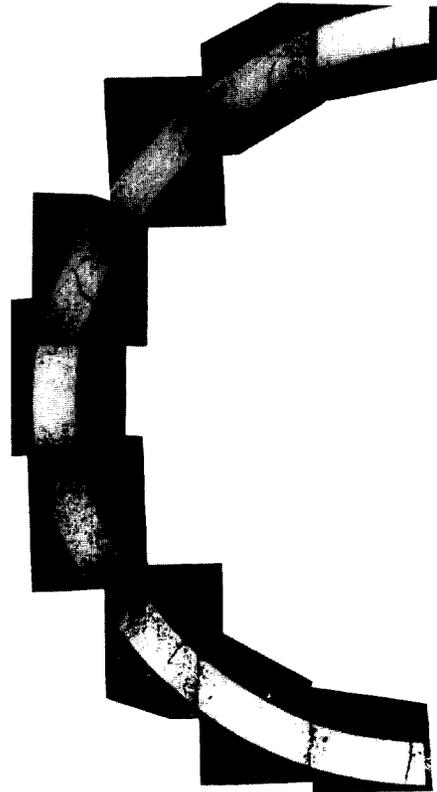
TYPICAL AXIALLY ORIENTED CRACKING IN PRIMARY SIDE OF INCONEL 600 STEAM TUBING(9)
